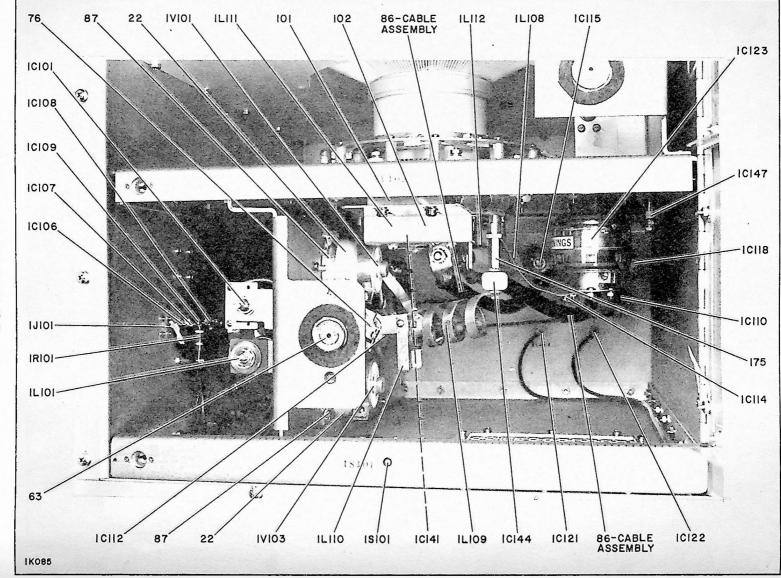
Driver Shelf and 1XV102 Shelf, Front View
